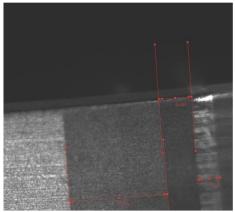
Cutting insert holder in the measuring device Zoller Genius 3s
